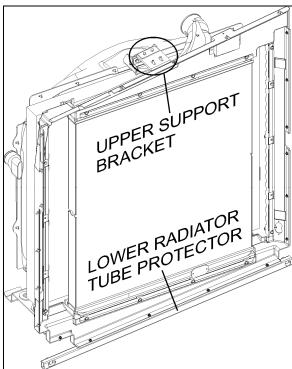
UPPER SUPPORT BRACKET & TUBE PROTECTOR
